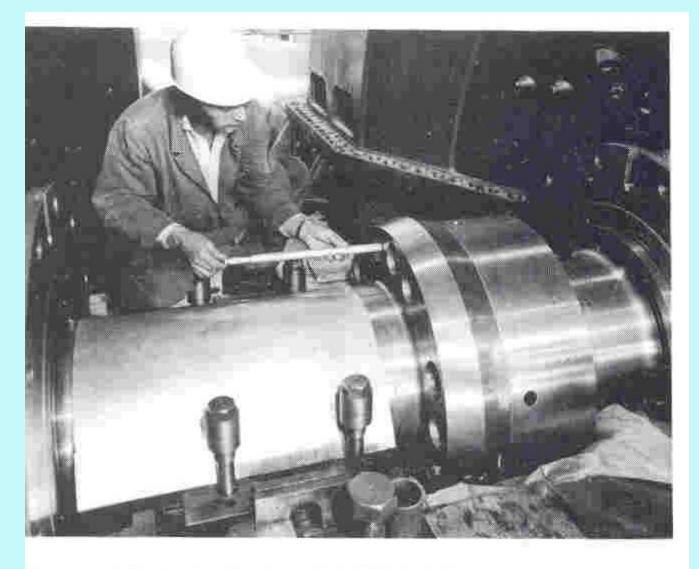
Measuring the Coupling Bolt Holes Using a Three-Point Gauge
